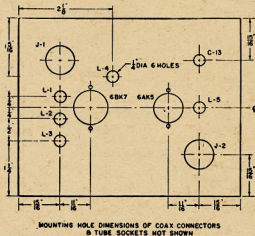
Panel layout of the S/N-6 Pre-Amplifier (back elevation).
